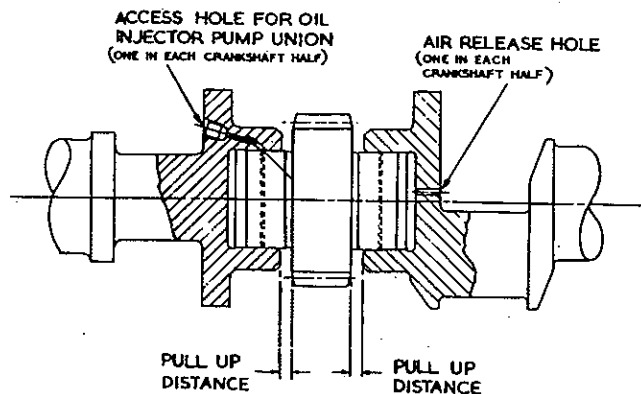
Assembly of 16 cyl crankshaft - oil injection method
